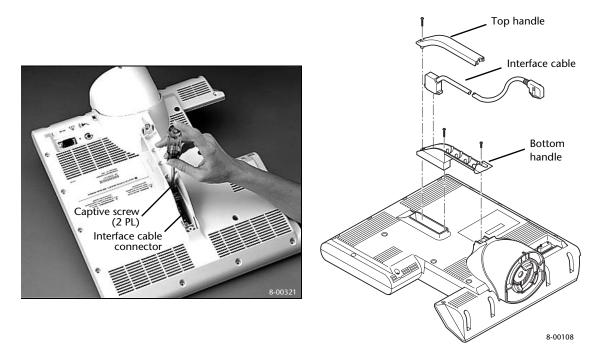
Removing 9.4-inch GUI handle assembly and interface cable
